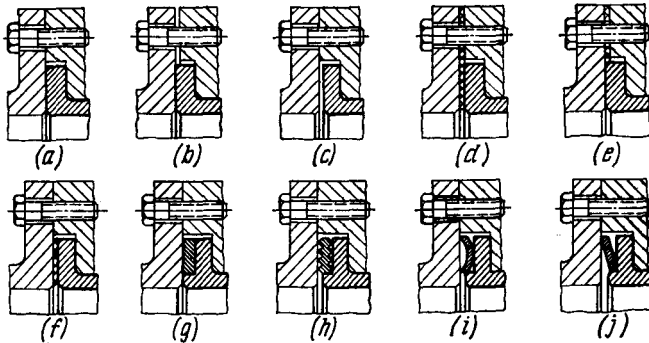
Tightening against two surfaces. Fastening of intermediate flange
